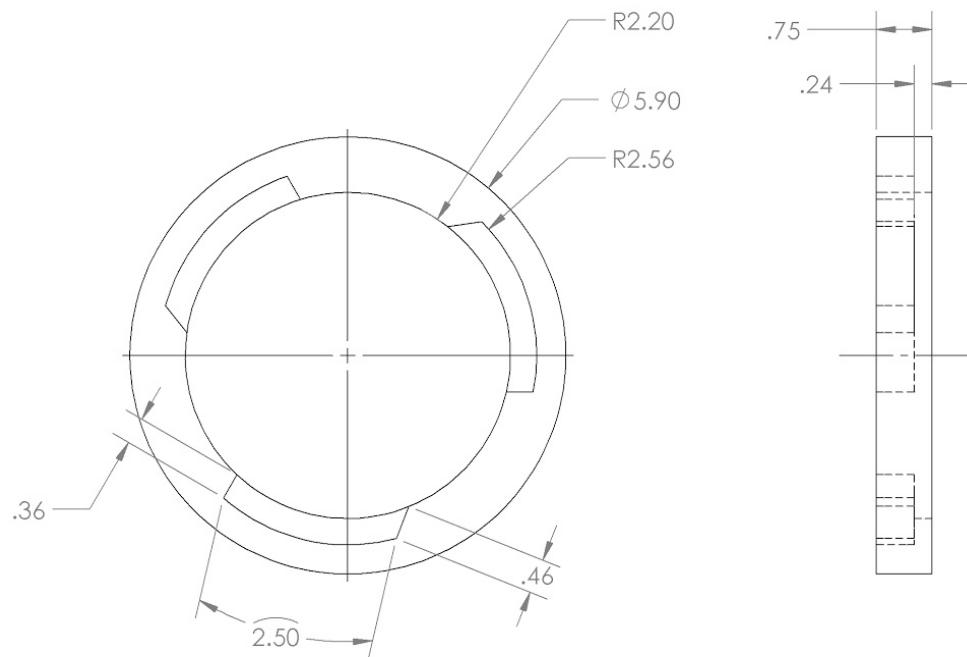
Locking Mechanism Bottom Outer Ring Drawing
